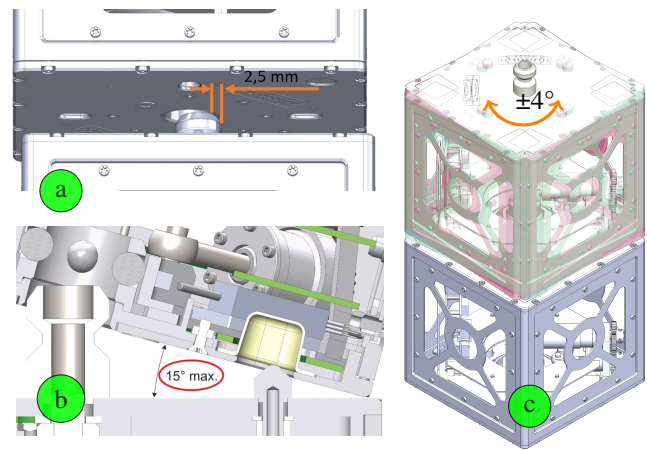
CAD renderings of EMI-MOD misalignment tolerance for the locking mechanism. a) horizontal misalignment, b) initial misalignment, c) rotational misalignment
